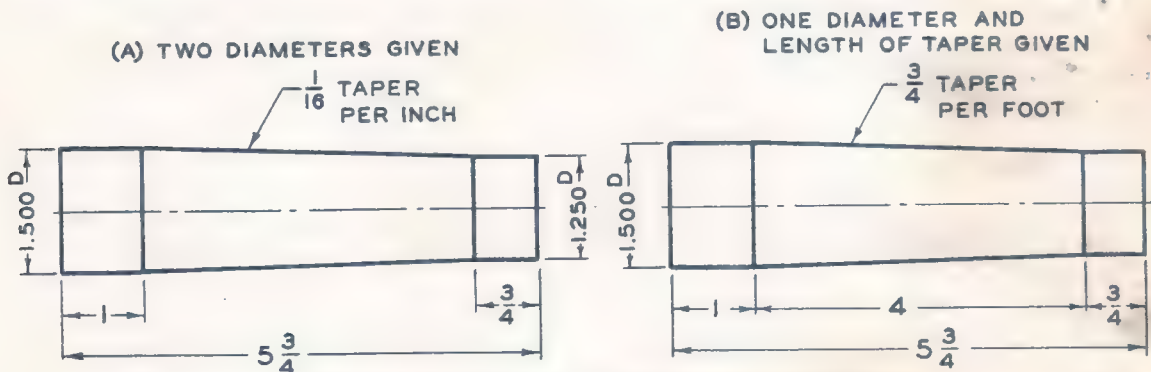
NOTES USED IN DIMENSIONING TAPERS
